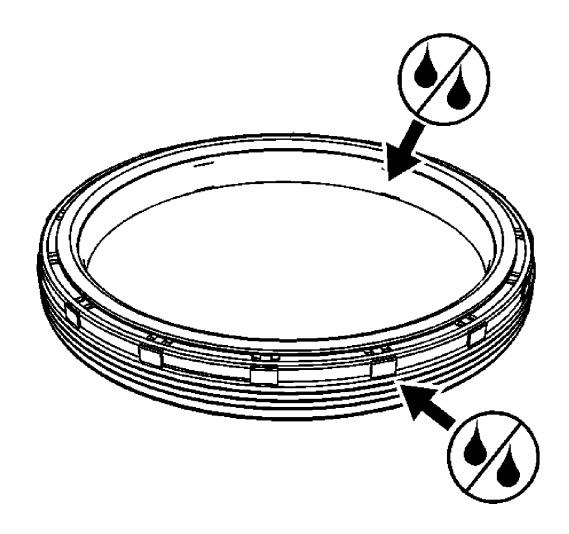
Identifying Rear Seal Lubrication Points Courtesy of GENERAL MOTORS CORP.
